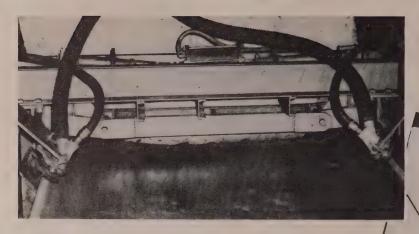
(left) — Edge cleaning steel plate in pipe fabricating plant
